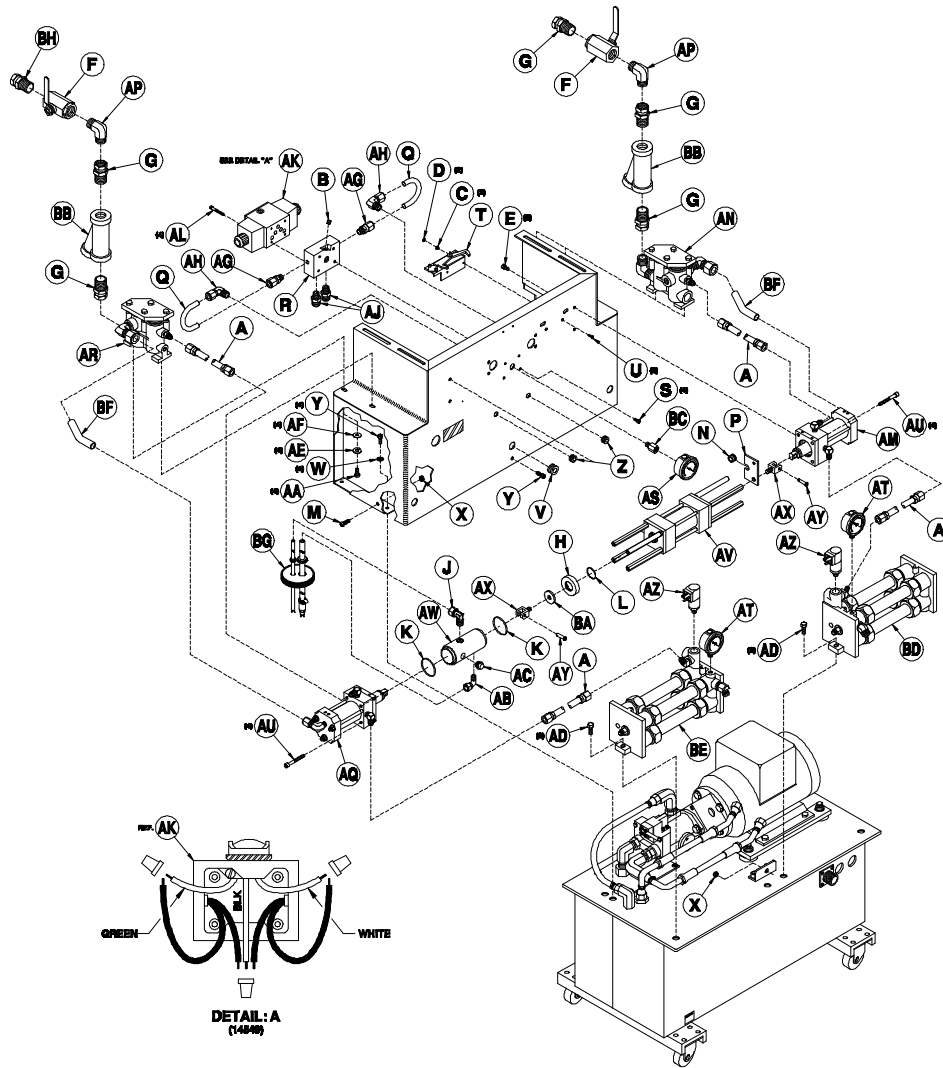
Center and Base Assembly (Part No. 15500-SIZE) Exploded View
